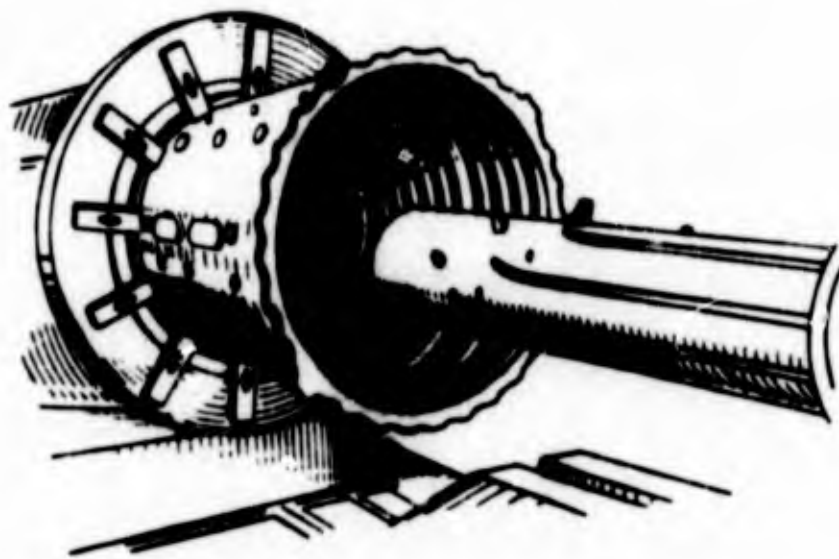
Boring of internal blade grooves in housing of an axial-flow compressor.
